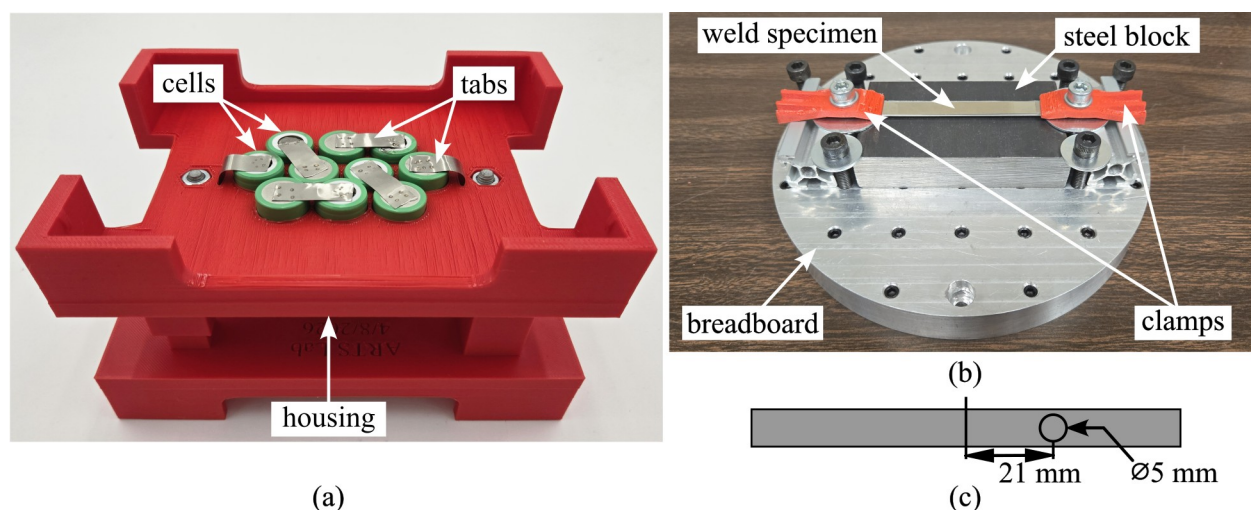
Test hardware setup, showing: (a) a custom housing for 18650 batteries with welded tabs; (b) the test jig holding one weld specimen; and; (c) a diagram of the weld pattern for all specimens.
